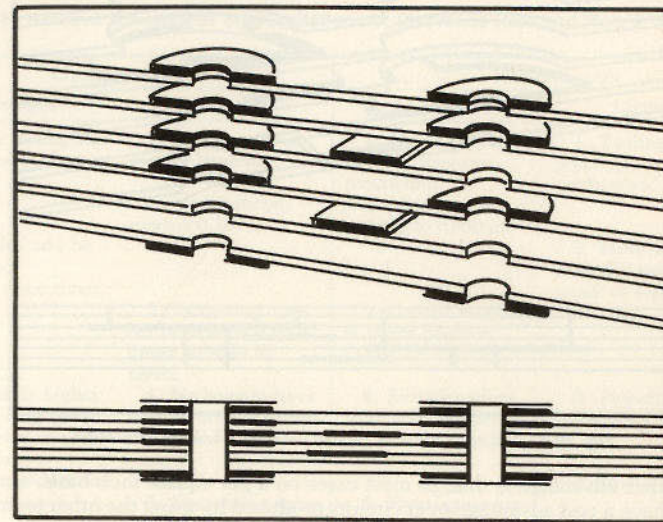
Cutaway view of typical plated-through-hole construction.
